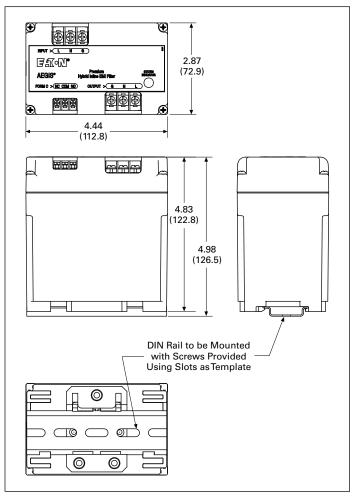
AGPHxxxxx Dimensions in Inches (mm)
